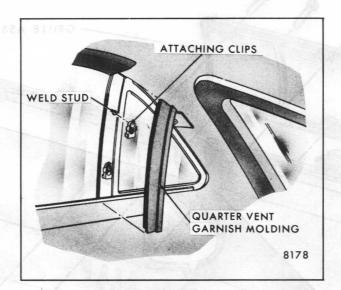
Quarter Vent Division Channel Garnish Molding "A-35" Styles
